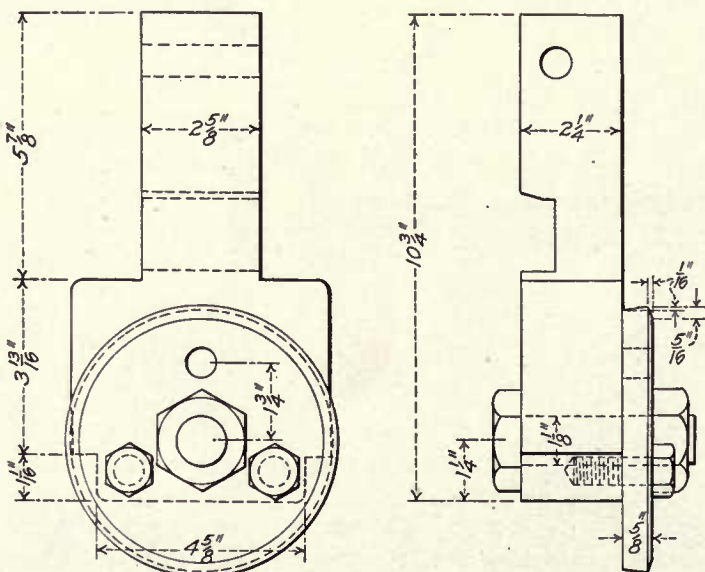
Tool for Planing Babbitted Truck Brasses.
